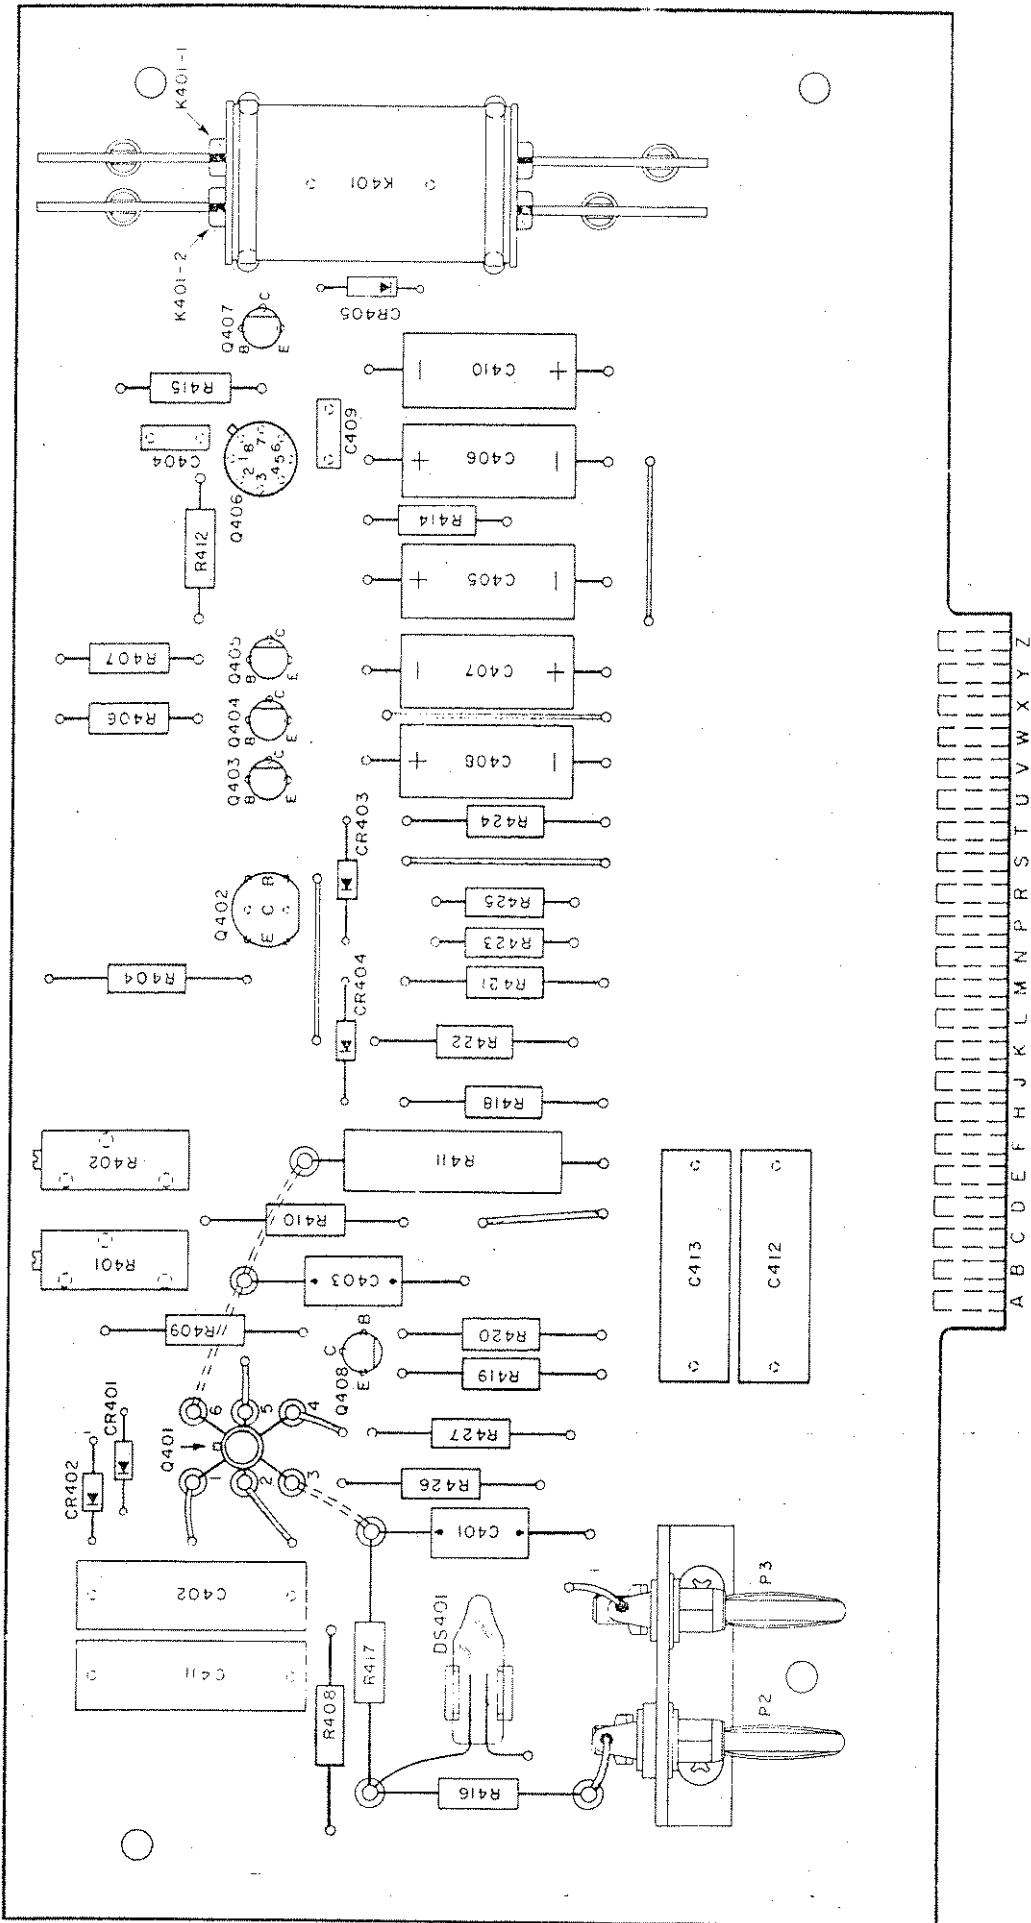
COMPONENT LAYOUT - AMPLIFIER P.C. BOARD ASSEMBLY (D-40450)
